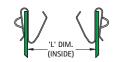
Spring-Spring L dimensions reflect initial insertion deflection.
